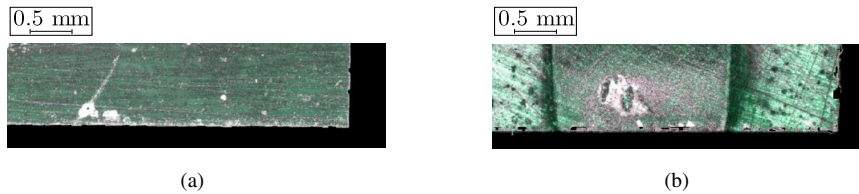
Rake face P-carbide tool (a) shows a new tool and (b) shows a tool after cutting AISI 4140 ( $v_c = 250$  m/min,  $f = 0.2$  mm).
